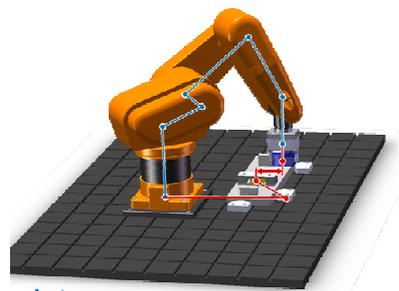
(a): Assembly of a slab-lens marking laser [12]
